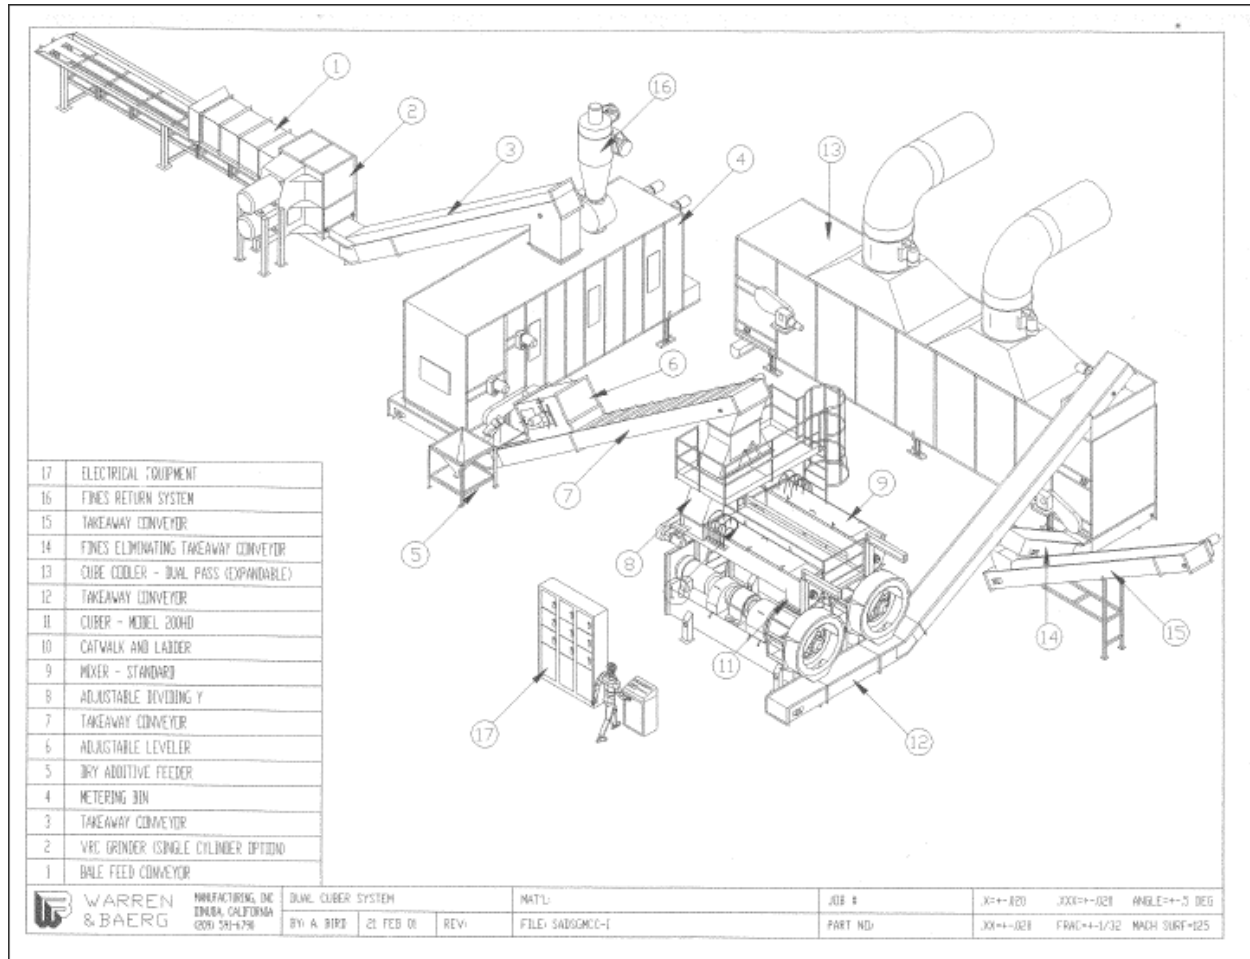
Configuration of a dual cubing system from Warren & Baerg Manufacturing, Inc. Image courtesy of Warren & Baerg Manufacturing, Inc.
